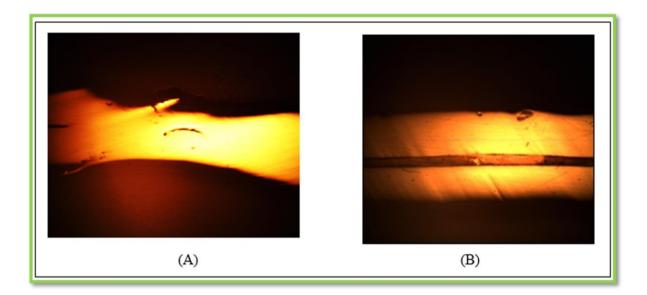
(A) 5X welding current 7300 Ampere without copper foil (B) 5X welding current 7300 Ampere with copper foil.
